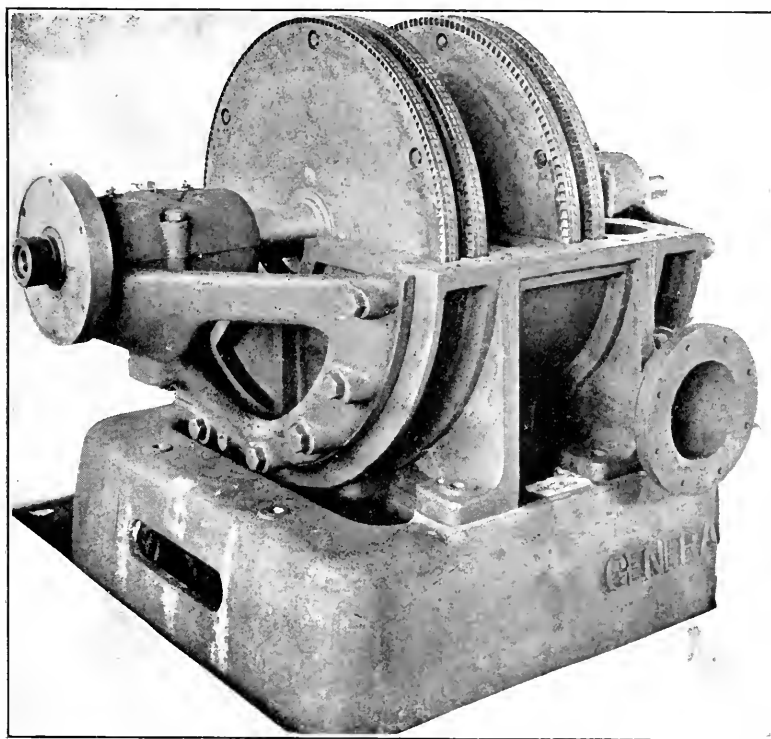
75-K.W. Curtis turbine-wheels, assembled in wheel-casing. Upper half of casing removed.
